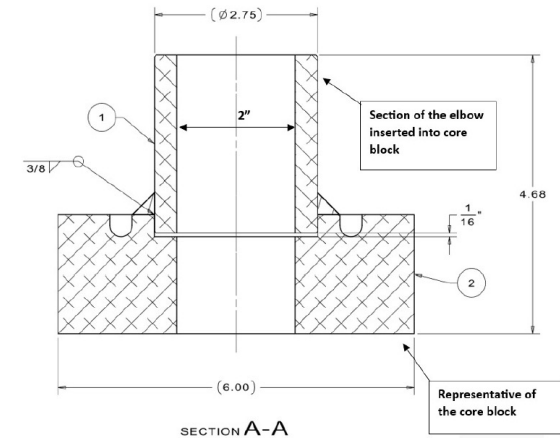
A representative drawing of the elbow welded to the side of the core block.
